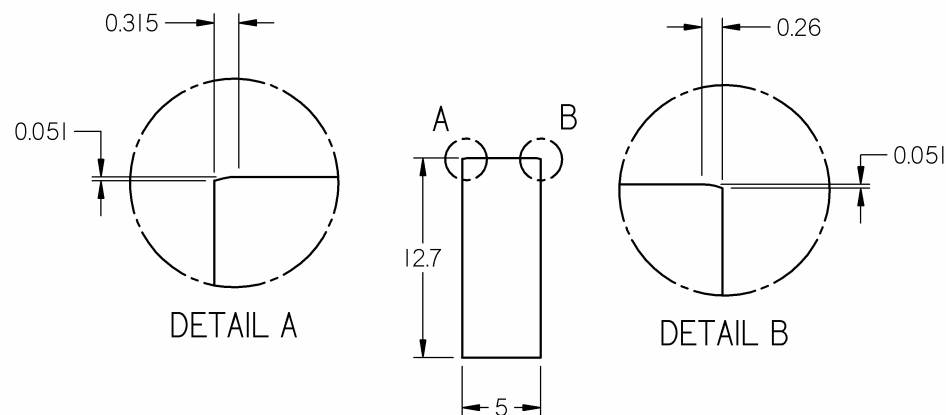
Cross section view of the gage section of fretting specimen 7B (dimensions in mm).
